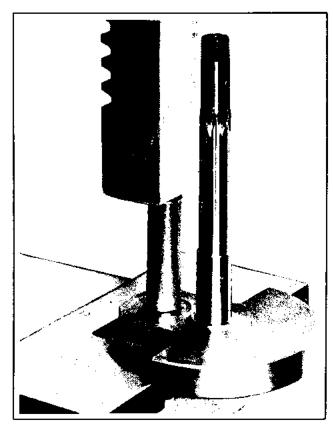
E-69. Pressing Crank Pin from Transmission Side Crankshaft (1963-1976)
